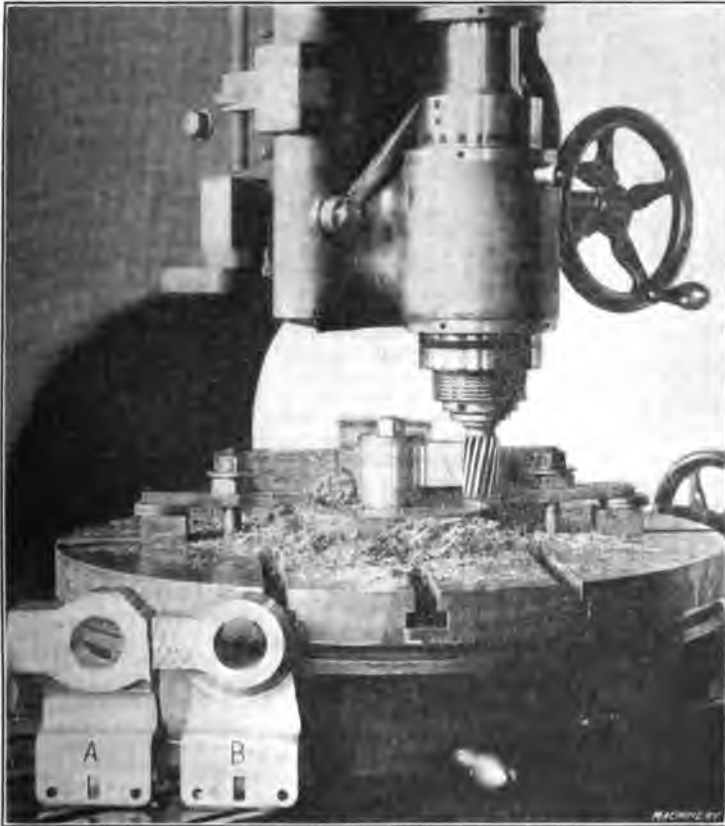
Milling Connecting-rod Bearing Brasses on Becker Vertical Machine
